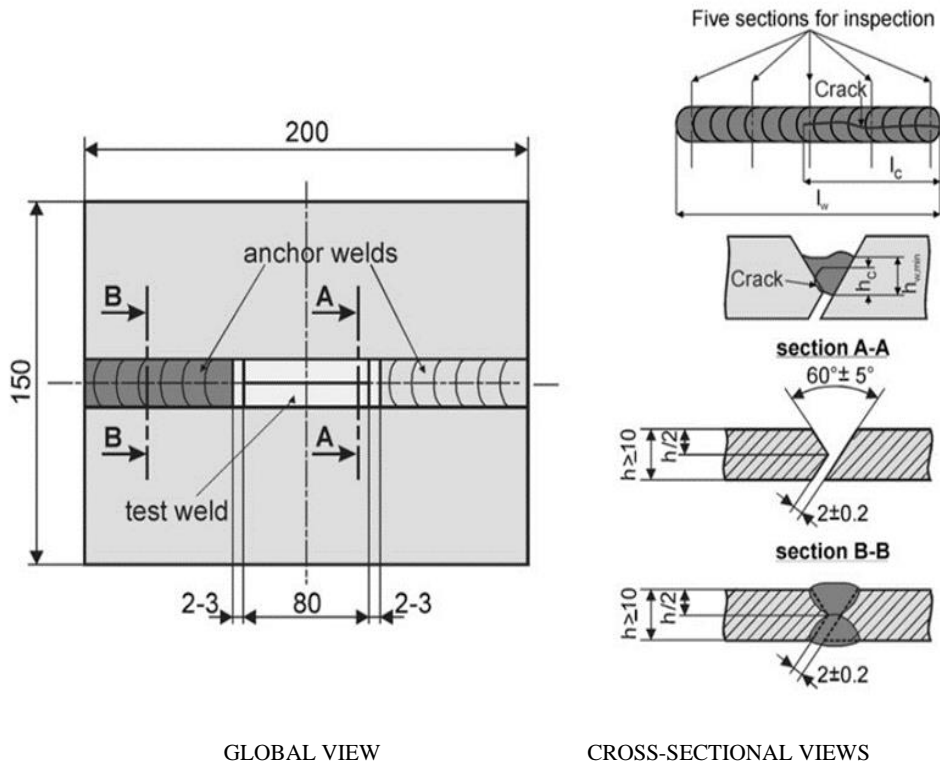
Illustration of a Tekken test mock-up ; before & after the weld bead deposition [11]
